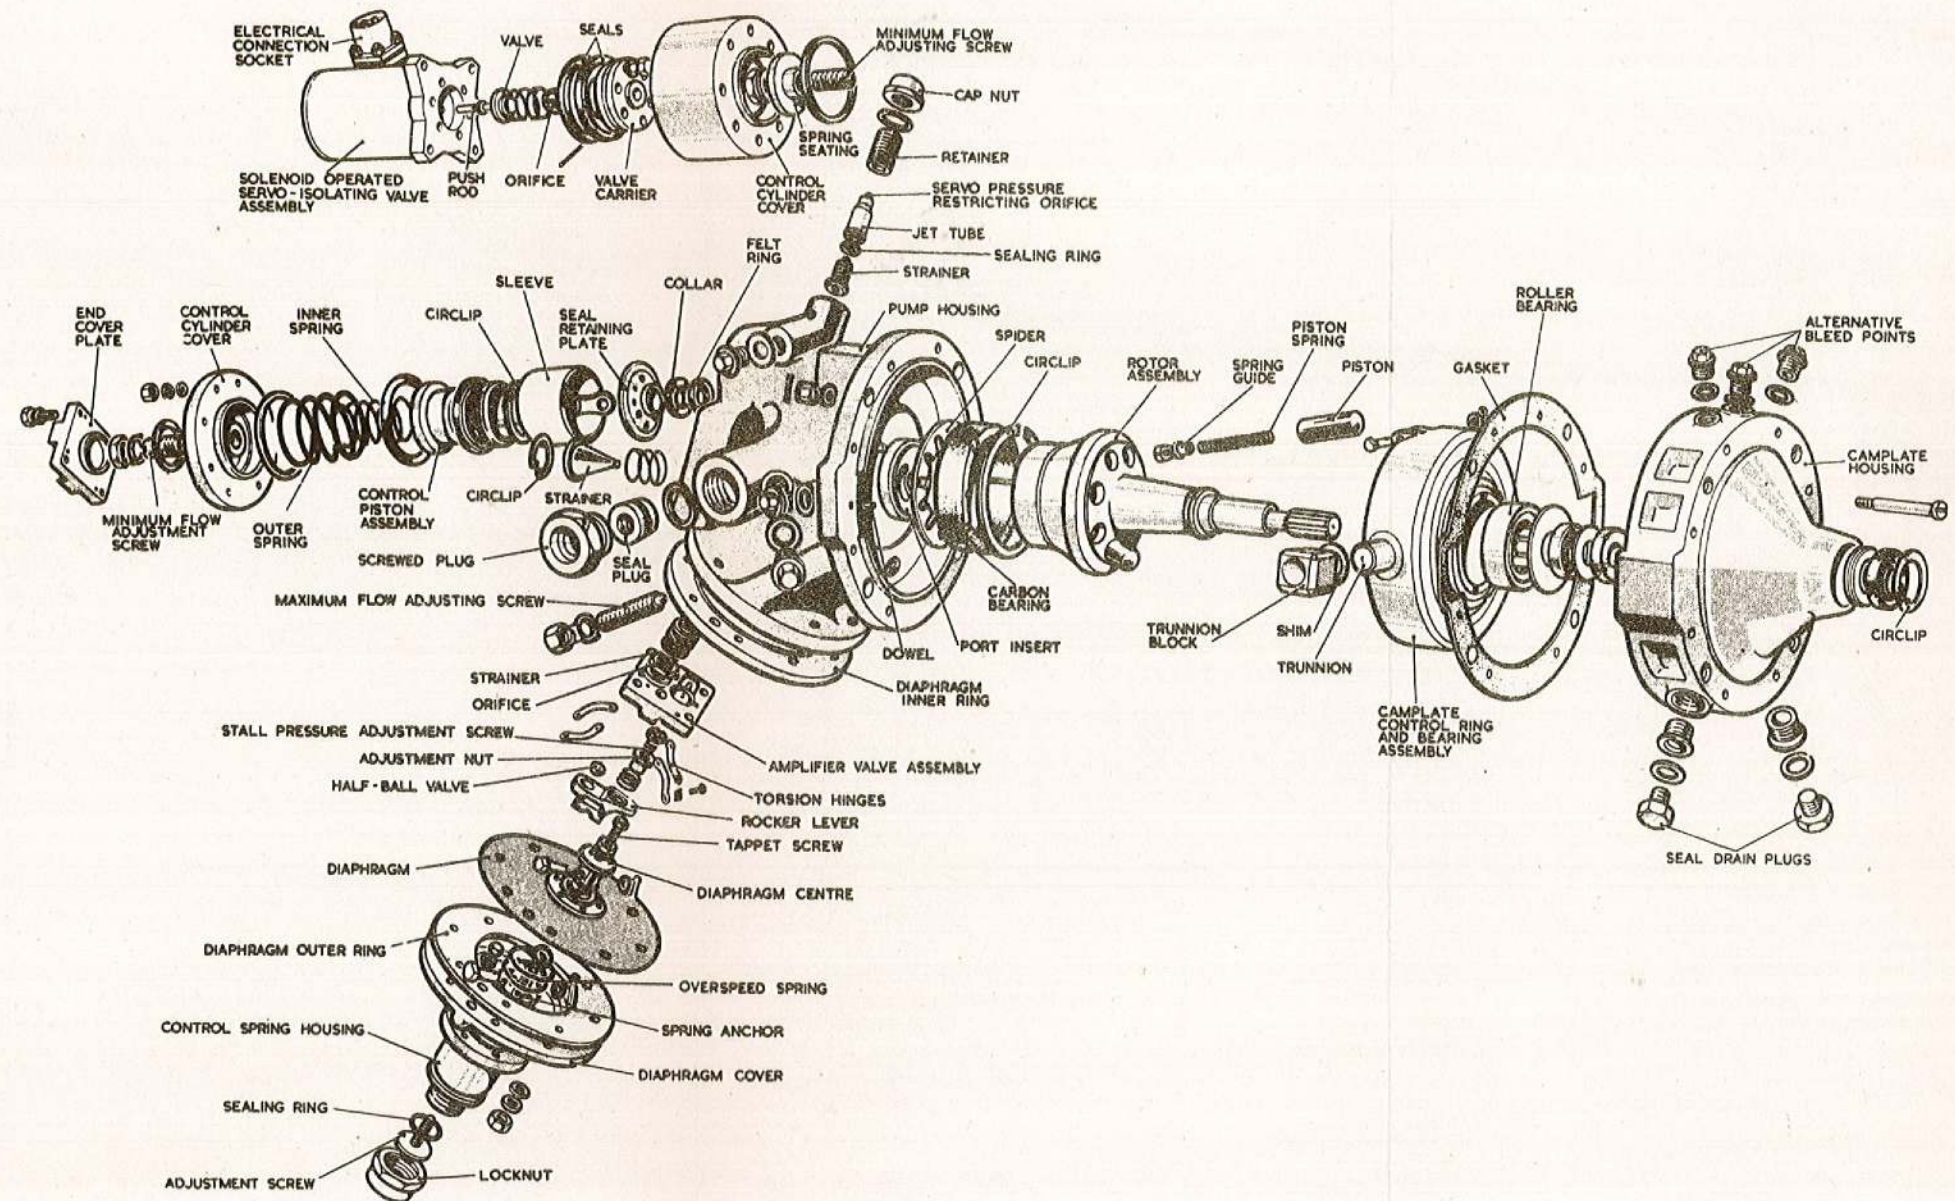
DISMANTLED VIEW OF FUEL PUMP
